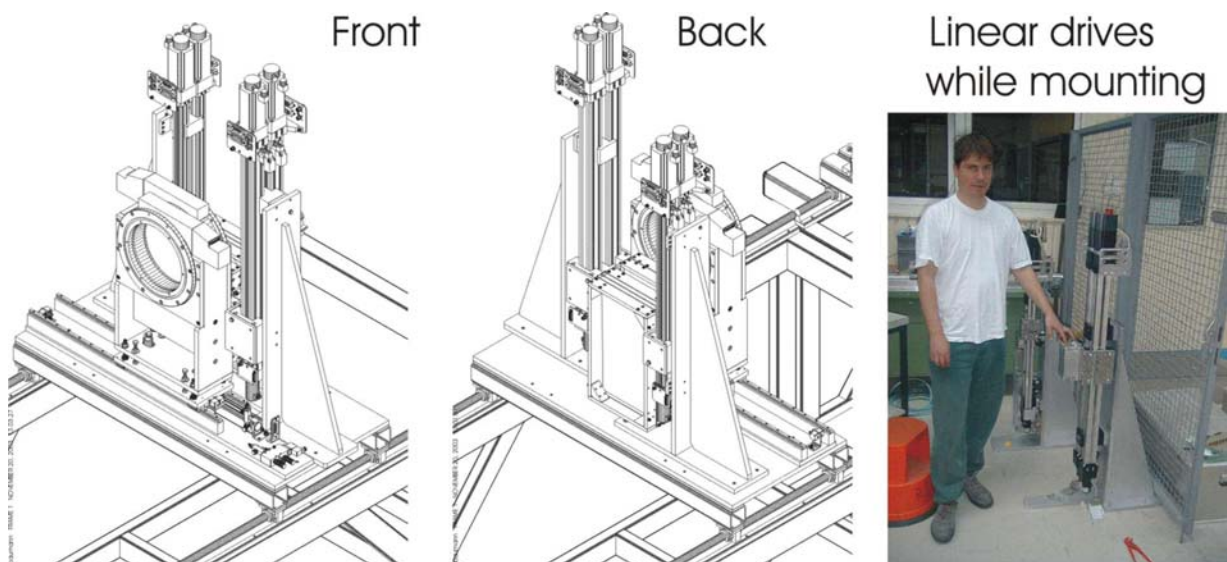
Drawings and first parts while mounting the prototype of the degrader for the energy buncher. This prototype will be used and tested for the FRS Ion Catcher setup.
